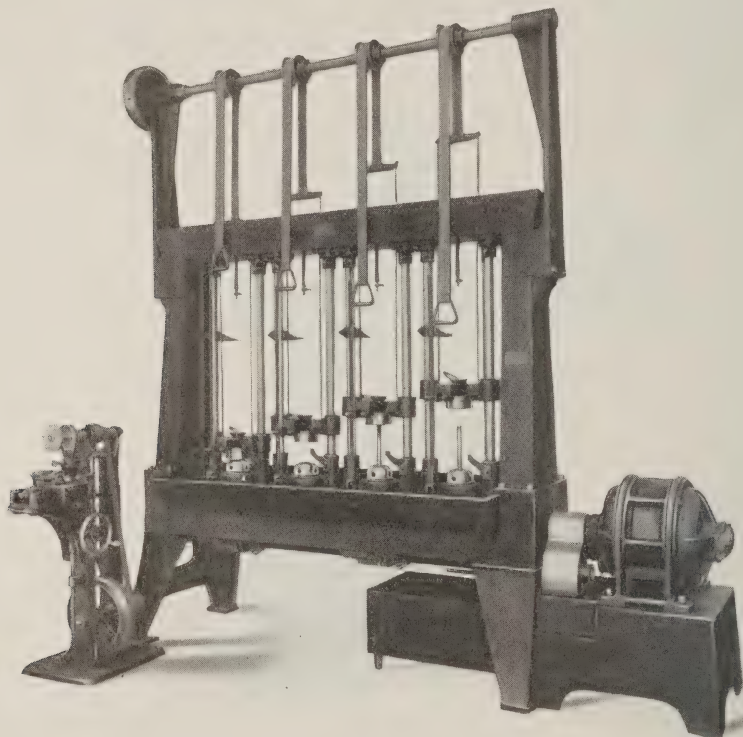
STAYBOLT-THREADING AND REDUCING MACHINE, WITH SPECIAL GRINDER FOR CUTTING TOOLS
